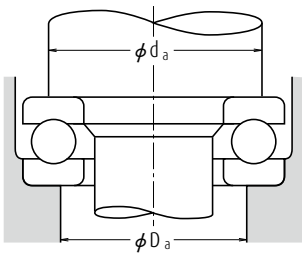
Face Supporting Diameters for Thrust Ball Bearings
